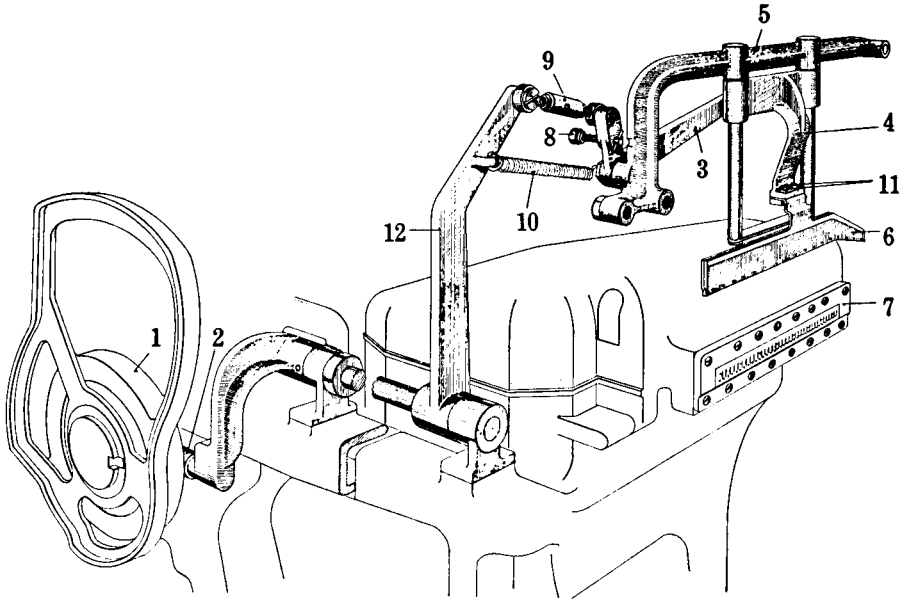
View showing details of pot mouthpiece wiper used on 42-pica Linotypes. This device is also available as optional equipment on 30-pica machines.
